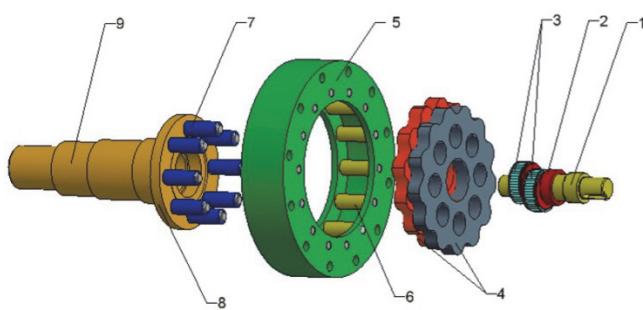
Cycloidal reducer (1- input shaft, 2-eccentric, 3- needle roller bearing, 4- cycloidal gears, 5- ring gear housing, 6- ring gear pins with rollers, 7- output roller, 8- output shaft speed assembly, 9- output shaft) [7]
